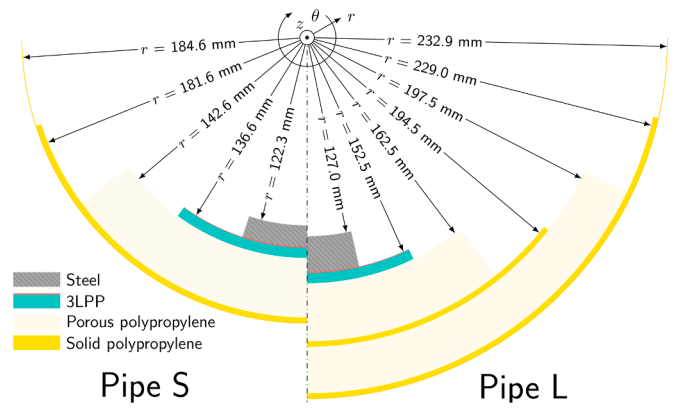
Quartile cross-sectional view (w/ dimensions) of the layer composition of Pipe S and Pipe L.
